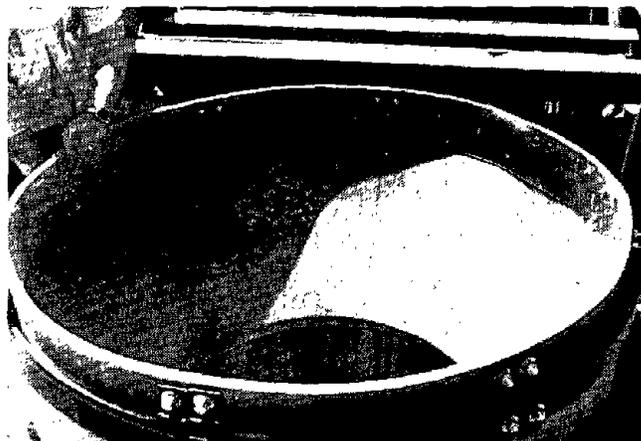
Installation of a one-piece resilient crusher feed cone liner.
